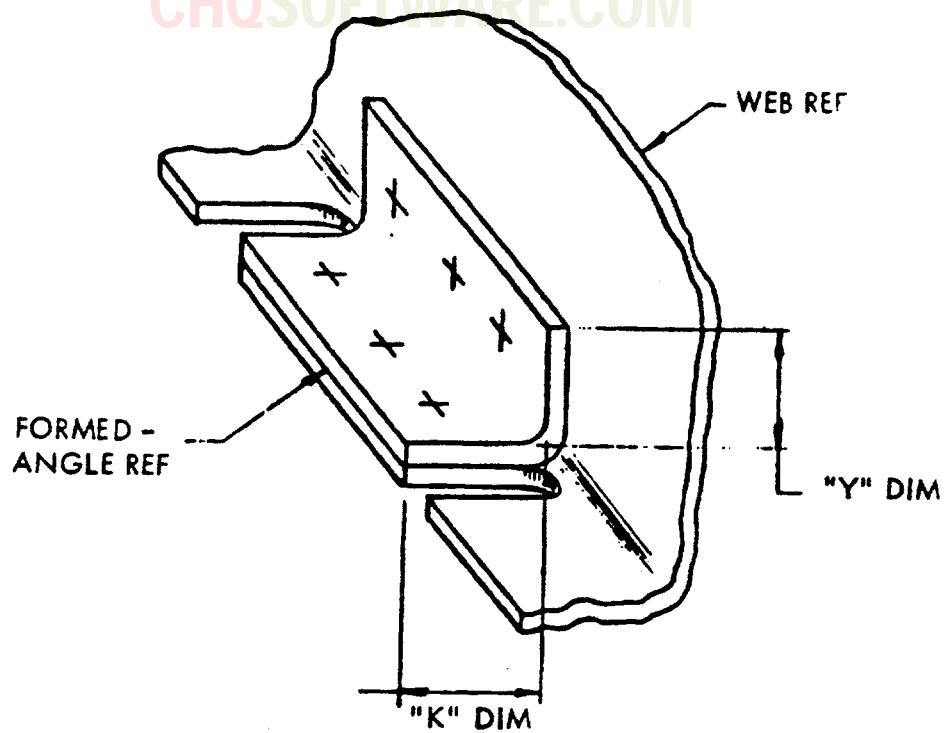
DAMAGE TO FLANGE TAB
